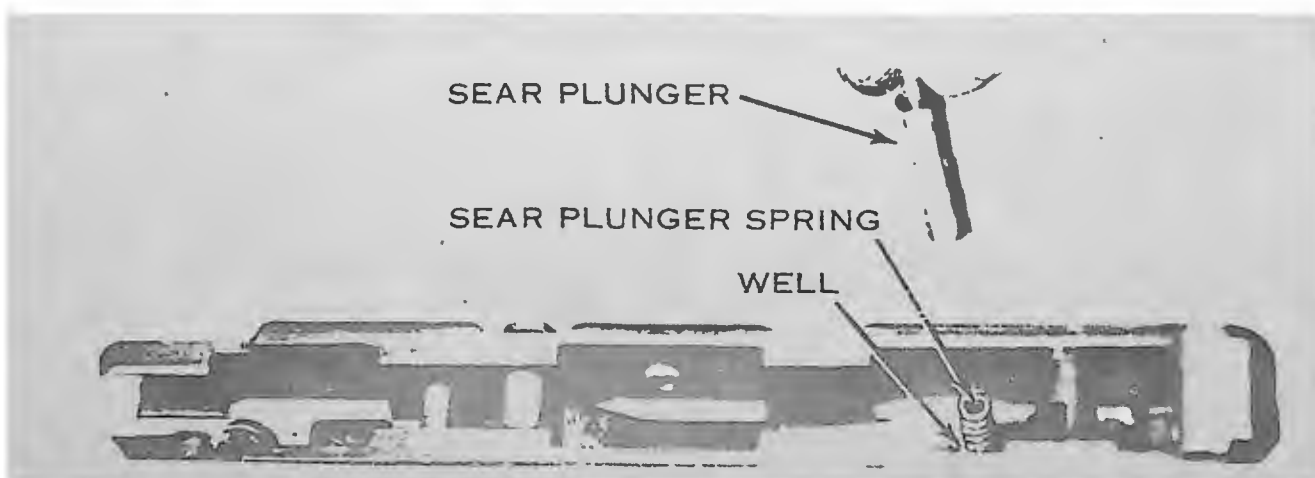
REMOVING THE SEAR PLUNGER AND SPRING
